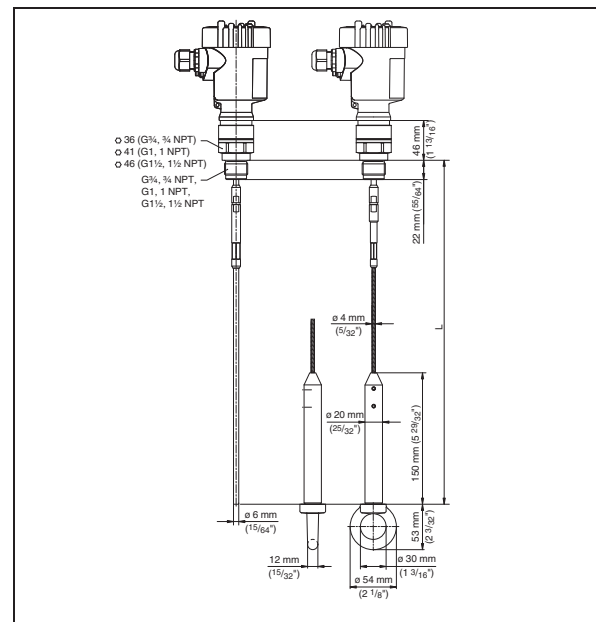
VEGAFLEX 61 - cable and rod version with thread
